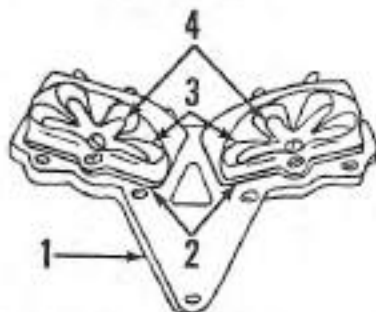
Rear view of inlet manifold showing inlet reed valve boxes (2), reed petals (3) and reed stops (4) must be centered over holes in box (2).
